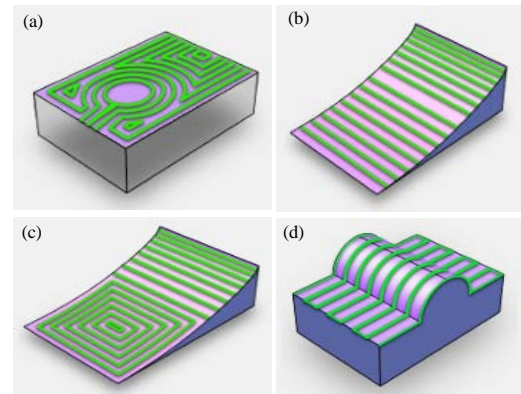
Toolpath strategy: a) Model area clearance; b) Optimize constant Z finishing; c) Step and shallow finishing and d) Raster finishing
